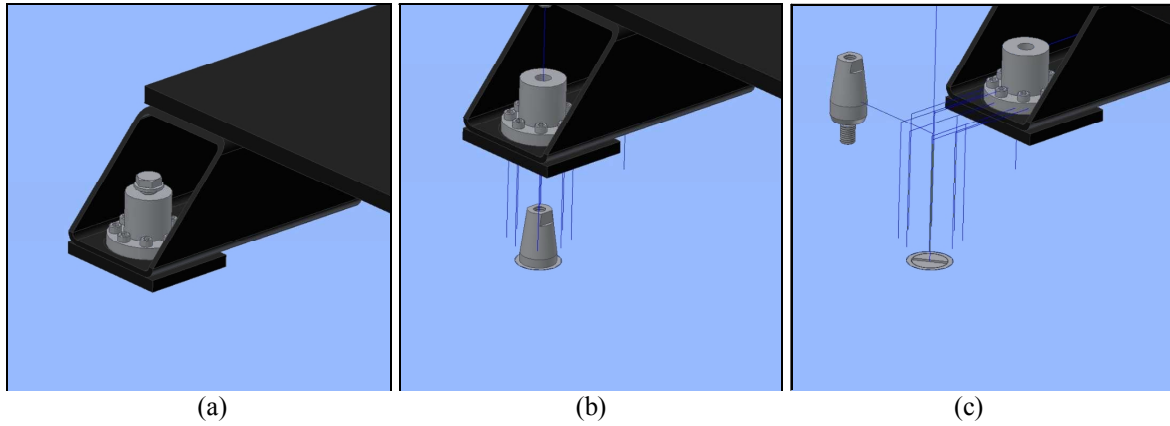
Anchoring concept for platform corners with provision for self-centering (a) in mounted state, (b) while being lifted and (c) with platform and centering pin removed and dust cover screw in place.
